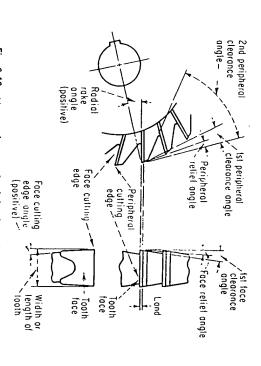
Nomenclature of solid side-milling-cutter teeth.
